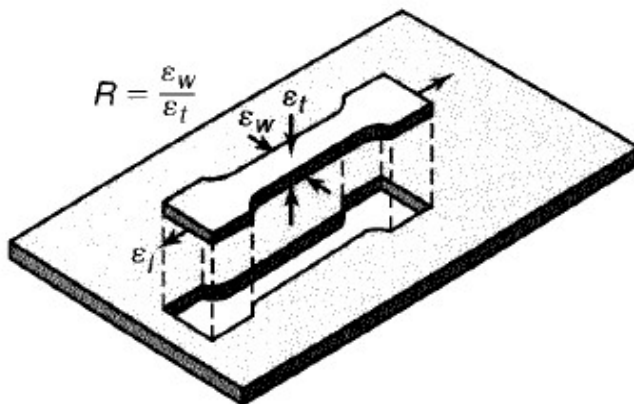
Strains on a tensile-test specimen removed from a piece of sheet metal.
